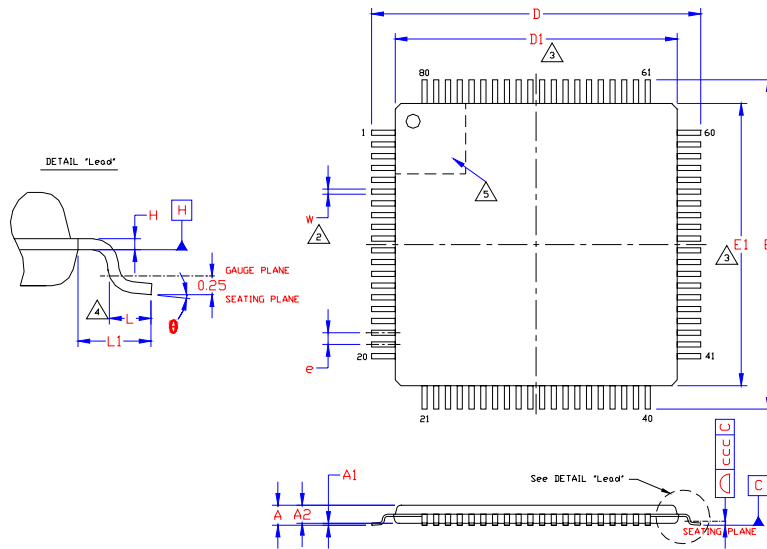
80 Pin TQFP Package Outline (12x12x1.4 mm body - 2 mm footprint)
